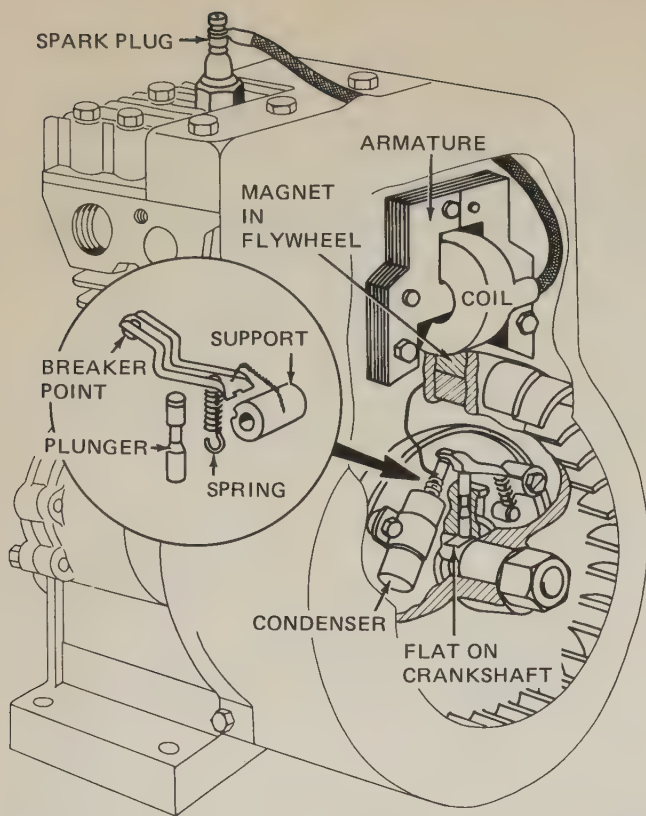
Cutaway view of engine, showing location and construction of the magneto. (Briggs & Stratton Corporation)
